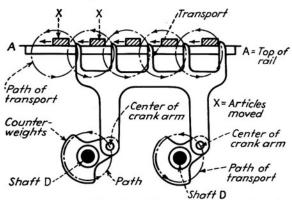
In this design, a rotary action is used. The shafts D rotate in unison and also support the main moving member. The shafts are carried in the frame of the machine and may be connected by either a link motion, a chain and sprocket, or by an intermediate idler gear between two equal gears keyed on the shafts. The rail AA is fixed rigidly on the machine. A pressure or friction plate may be used to hold the material against the top of the rail and prevent any movement during the period of rest.
